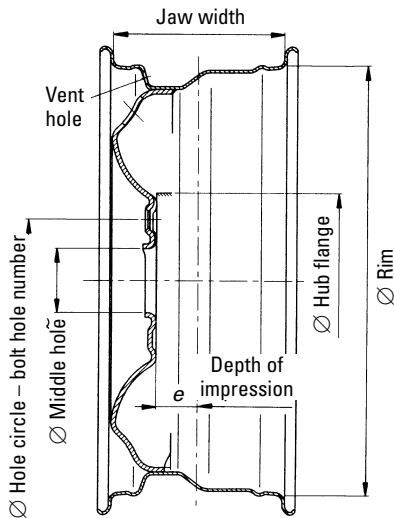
The sheet metal disc-type wheel used in series production vehicles consists of a rim and disc. To avoid fatigue fractures, the wheel hub flange diameter should be greater than the dish contact surface. Wheel offset e (depth of impression) and kingpin offset at ground r_g are directly correlated. A change in e can lead to an increase or a reduction in r_g .
